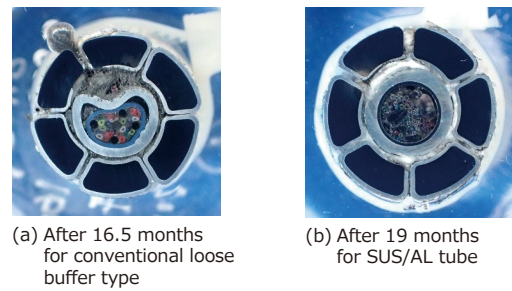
Cross-sectional photo after testing OPGW 70 mm²
